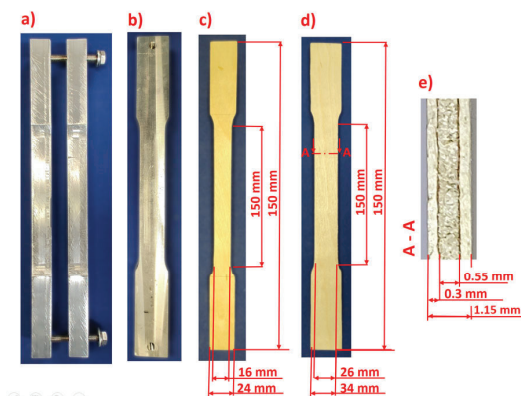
a) and b) specimen preparation tool; c) specimen for  $E$ -modulus and  $\nu$  testing; d) specimen for borehole testing; e) specimen cross-section.
